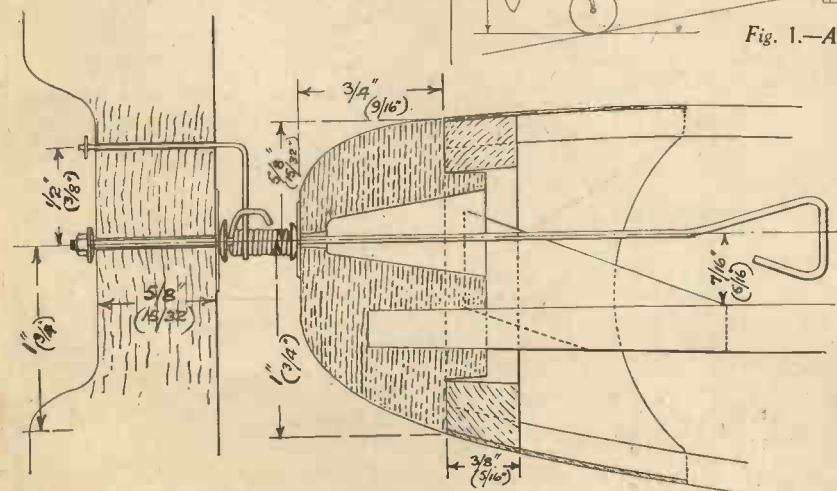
Details in section of the fuselage nose and airscrew drive.
